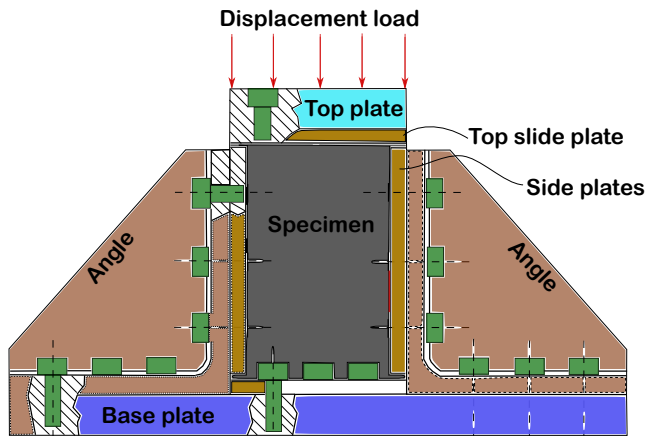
Illustration of a part of the open-hole compression fixture where the specimen is clamped between the steel blocks, leaving the gauge section unclamped.
